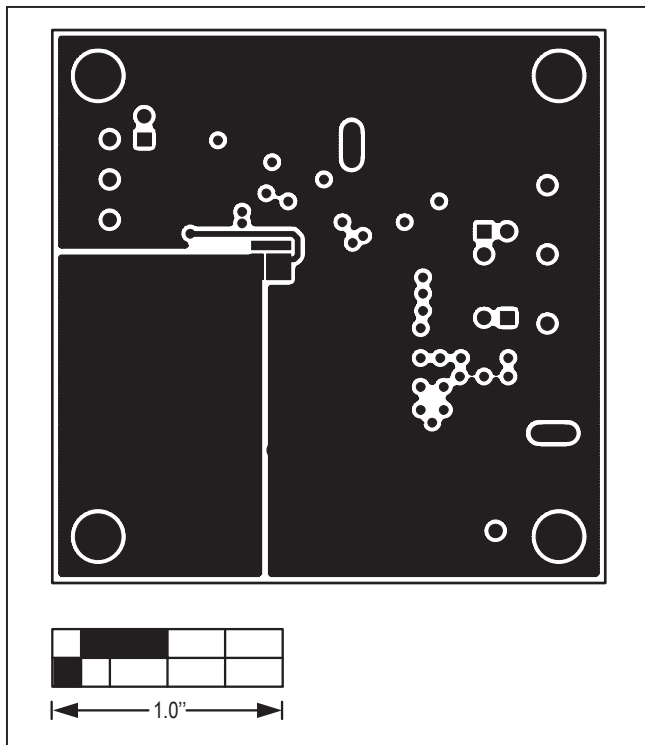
MAX17016 EV Kit PCB Layout—GND Layer 2
